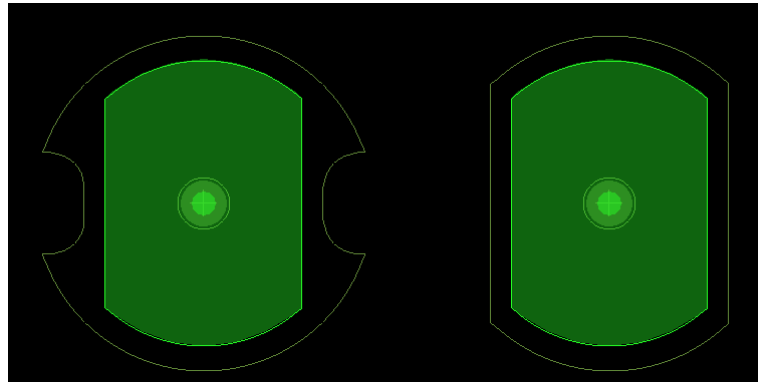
PCB Design of sample holder parts. These parts are used to provide support and make the electric contacts with the sample. Both parts are coated with $35\ \mu\text{m}$ thick copper layer. One of the substrates can be glued to sample after one side polish of sample and then it will be easy to polish other side without possibly breaking the sample.
